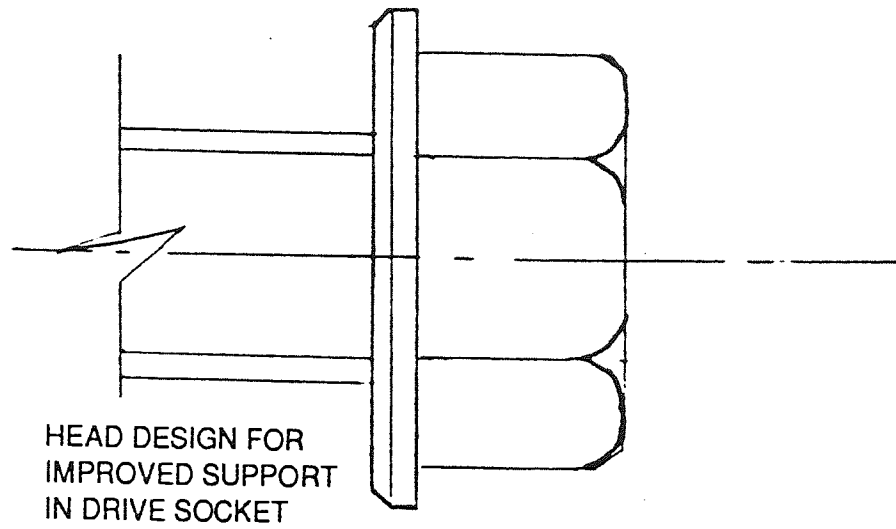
IMPROVEMENTS TO DRILL SCREW HEAD DESIGN
